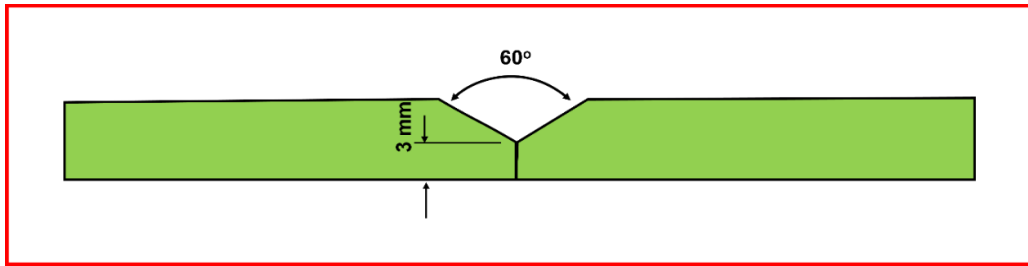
Schematic drawing of the butt joint design of 2507 SDSS FSW joint.
